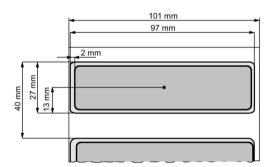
Dimension drawing SIMATIC RF630L 6GT2810-2AB02-0AX0
